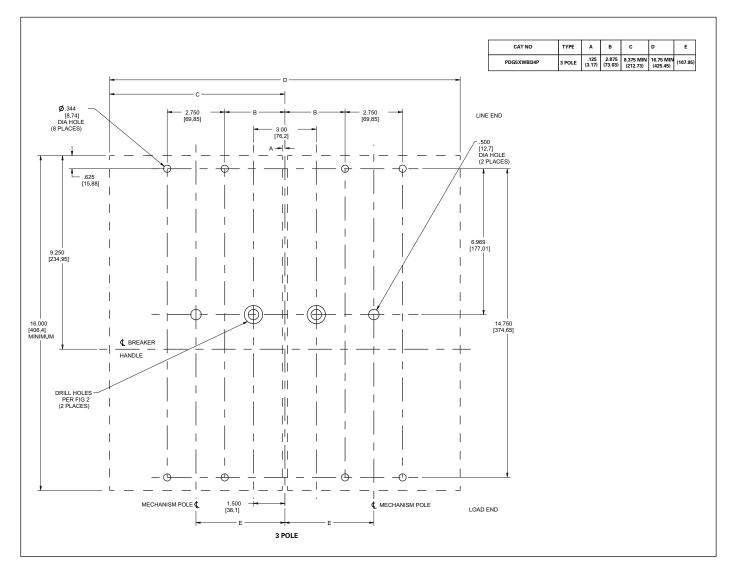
PD5-Frame 3-Pole Circuit Breaker Mounting Panel Hole Sizes, and Dimensions.
